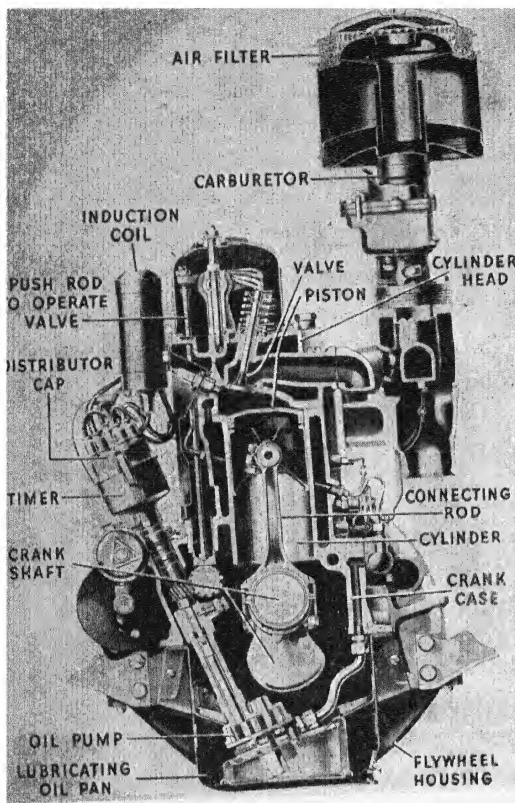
A cut-away view of a modern automobile engine. This is known as the *over-head valve* type of engine. Find out how the valves are arranged in other types of engines. Also find out the purpose of any of the labeled parts that you do not know about. After you have studied the next few pages, examine this picture again to see how many of the parts you can explain. (General Motors photo)
